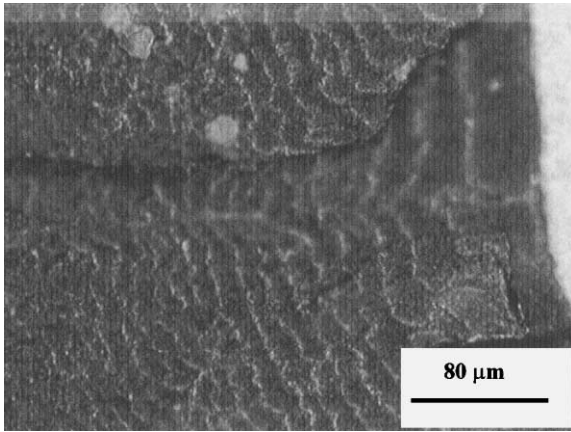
A typical photograph of fracture surface showing striations. These striations indicate the discontinuous nature of DHC crack propagation.
